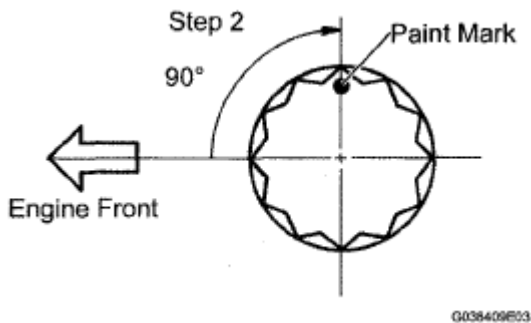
Identifying Front Mark Of Bearing Cap Bolts With Paint
